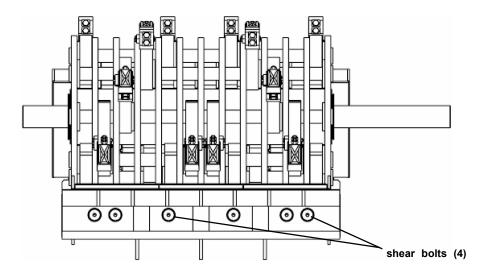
Front view of screen rack in up position and shear bolt locations. (their are six bolt holes; use only four shear bolts)
